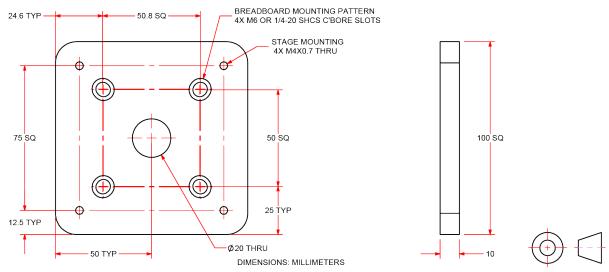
ANT95R Mounting Plate (-MP) Dimensions
